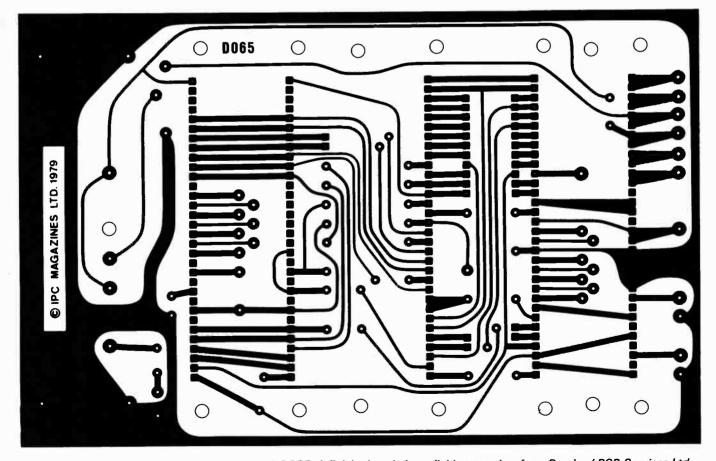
Copper pattern for the new mother board, D065. A finished p.c.b. is available to readers from Readers' PCB Services Ltd. TELEVISION AUGUST 1979
